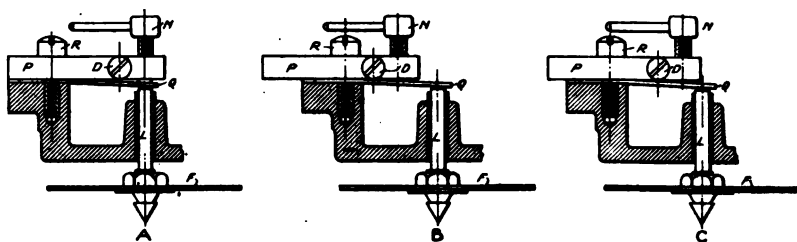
Showing Adjustment of Spring Regulating Cadillac Carbureter.
